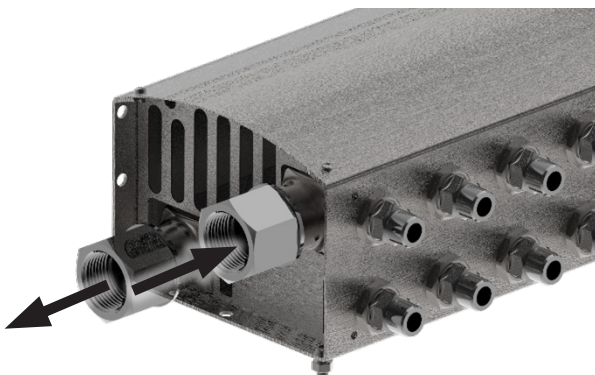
Side view of WFMd with female fittings installed on the inlet and outlet ports
